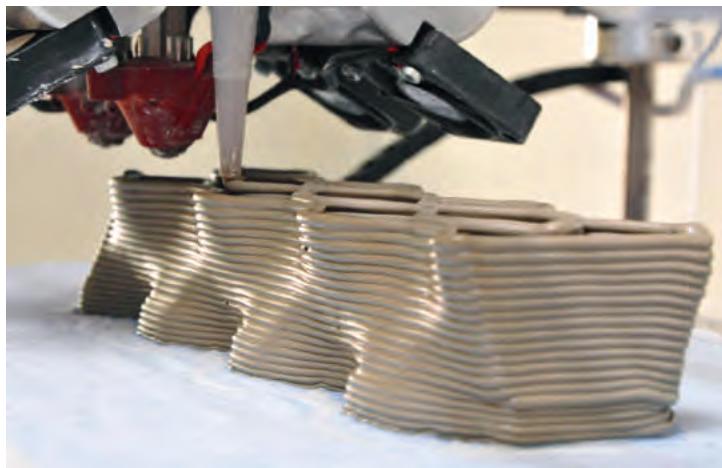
3D printing bricks with a liquid ceramic mixture on a modified desktop 3D printer.
